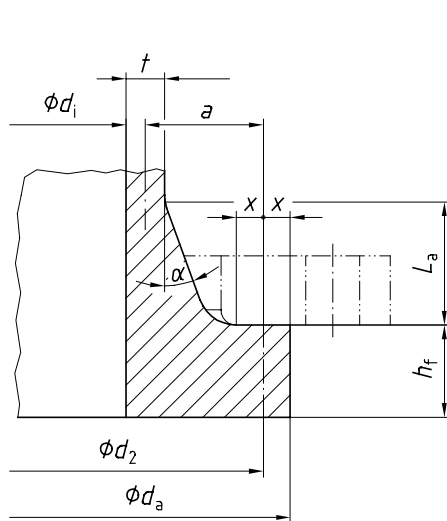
Fusion welded stub flange (shown without gasket)
